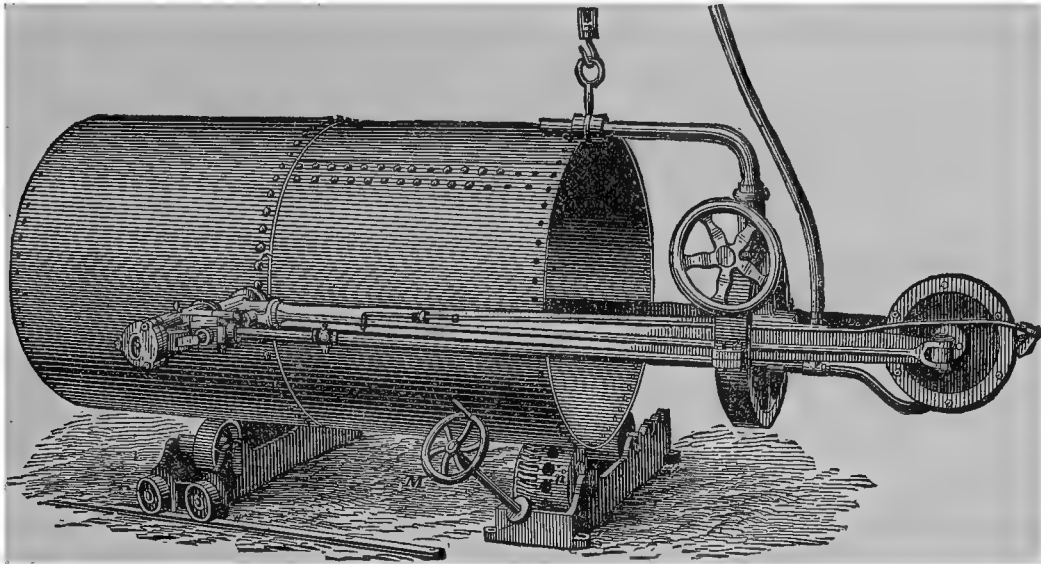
MANNER OF HANDLING BOILERS IN RIVETING.
